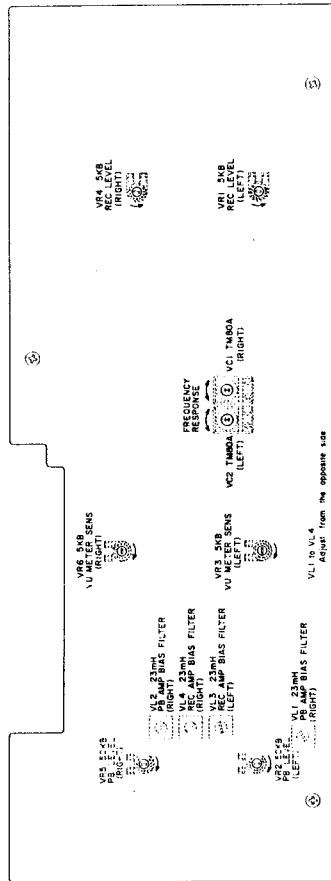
Amp P.C Board LE-5801A (GX-4000D)
